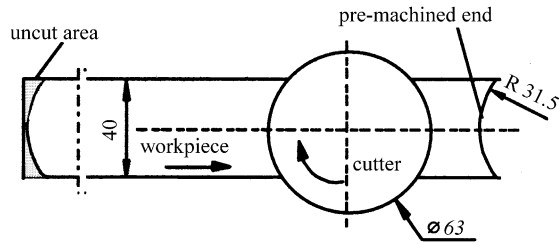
Cutter–workpiece relative position and the end geometry of the workpiece (dimensions are in millimetre).
